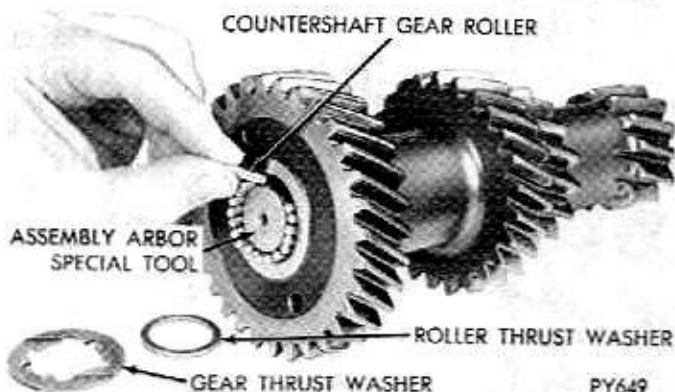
Countershaft Gear—Roller Bearing Assembly
